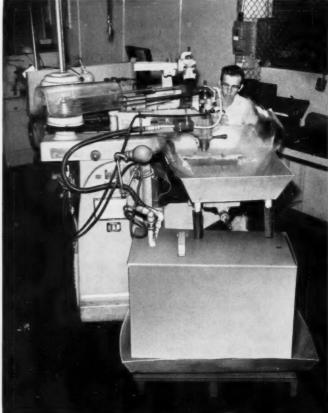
Equipment at the rear of a horizontal milling machine supplies sub-zero coolant through a 2-inch tube to the cutters and work.
